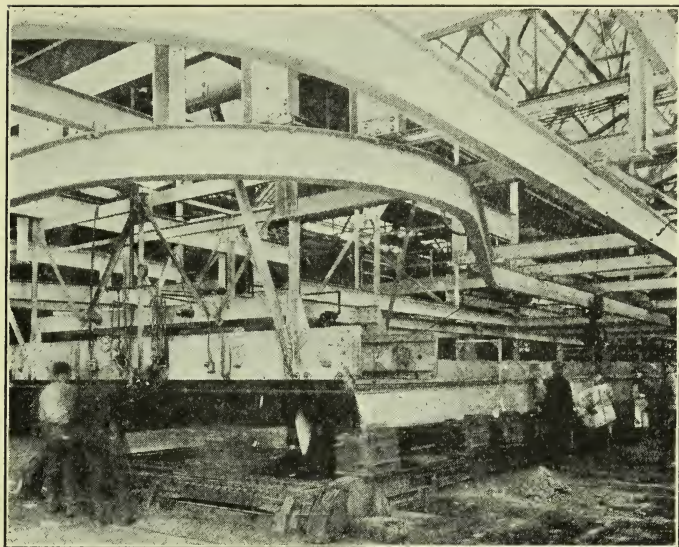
AFTER THE MOLDS HAVE BEEN POURED THEY TRAVEL TO THE END OF THE OUTSIDE CONVEYOR WHERE THEY ARE SHIFTED MECHANICALLY TO THE CENTER CONVEYOR THAT CARRIES THEM TO THE SHAKE-OUT ROOM
